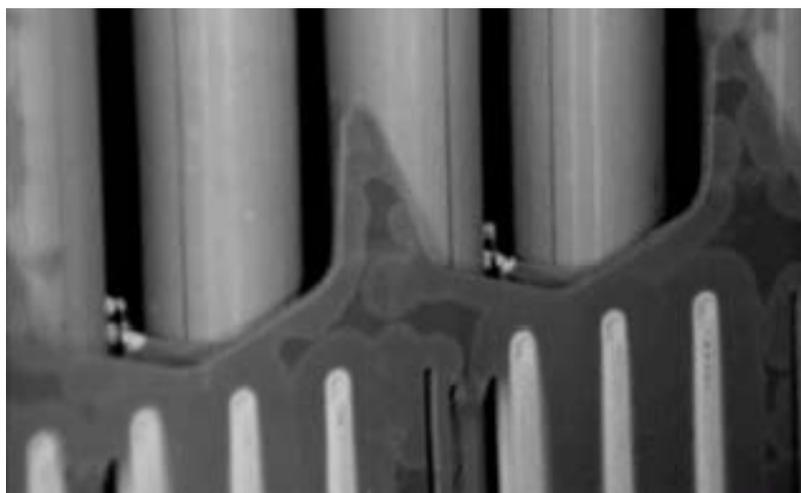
Condition of Zr1%Nb grid 14 weld joints, WLTA AA03-03, face 1, inspection 2008.
